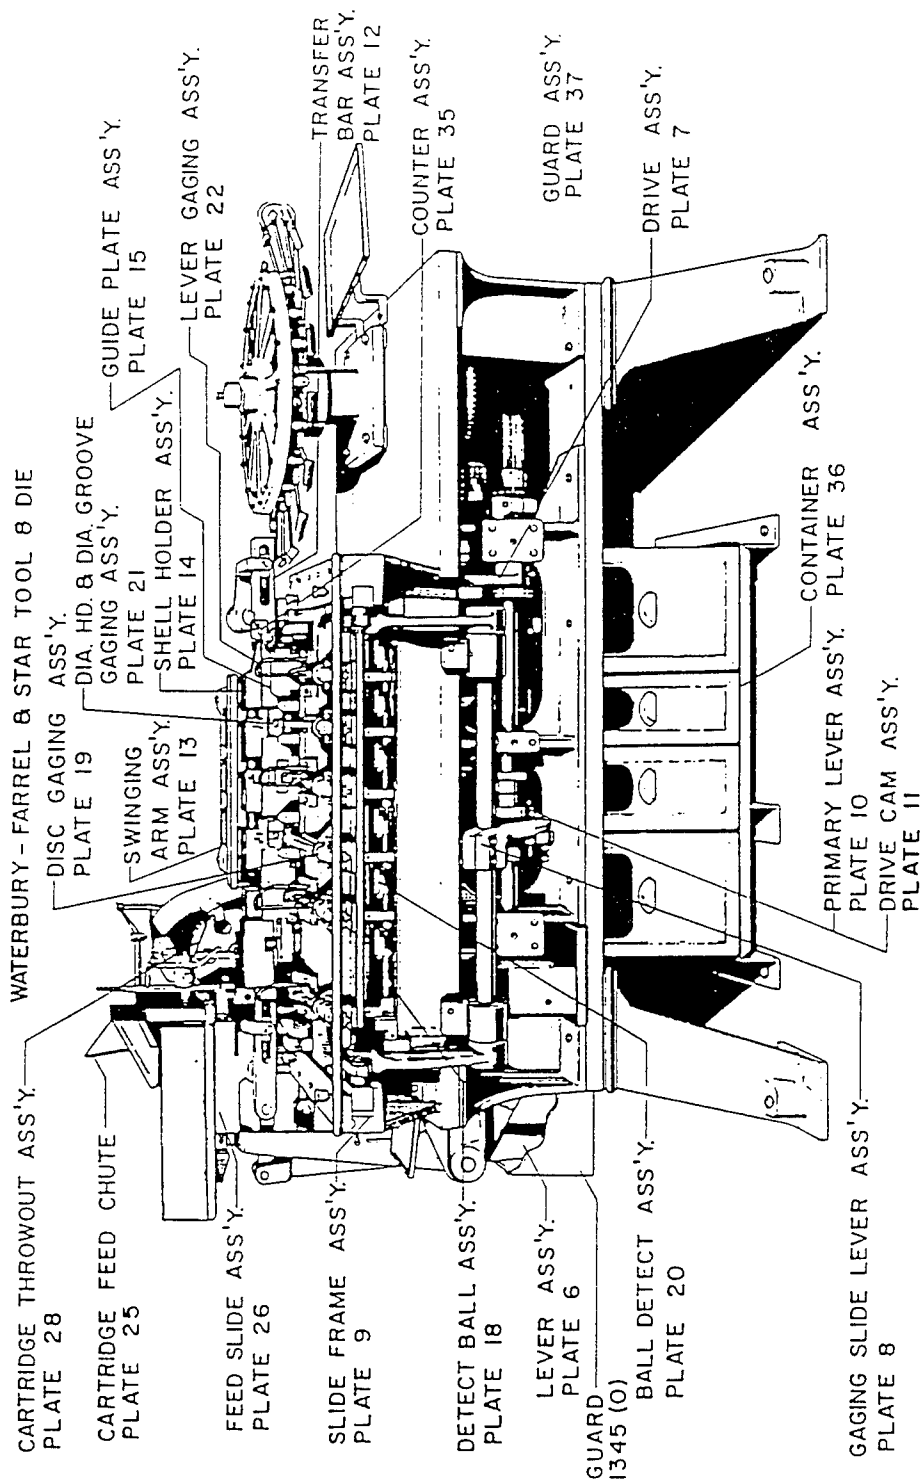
Gage and weigh machine (from Murphey et al. 1993).
